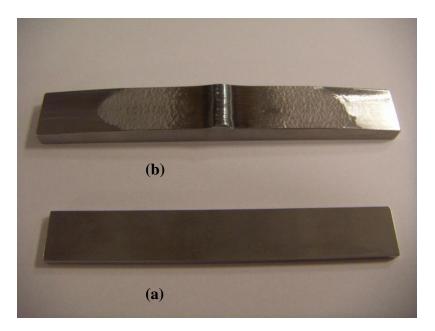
Typical Four-Point Bend Specimens: (a) Parent Material Specimen and (b) As-Welded Specimen
